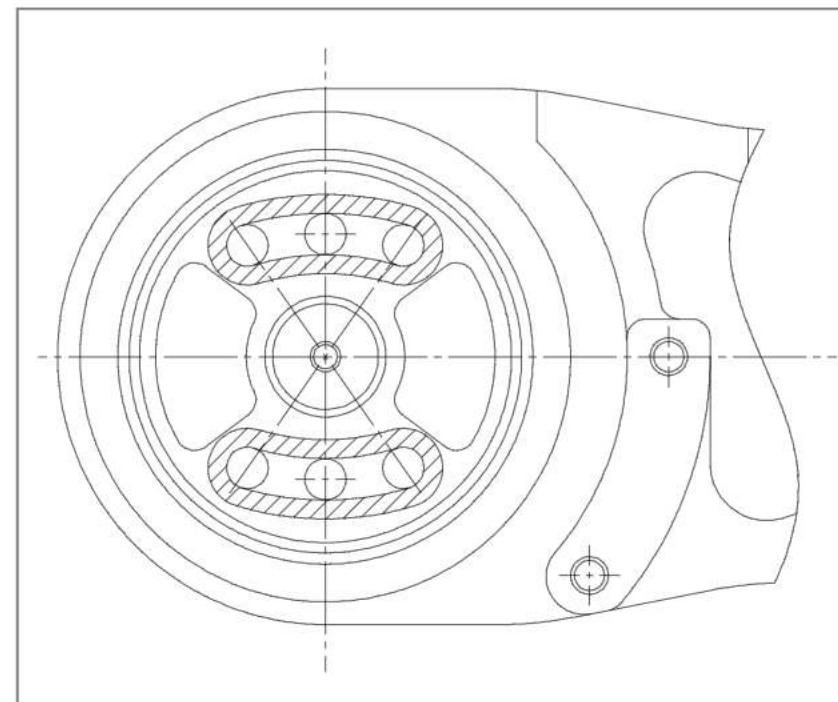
(b) Applying sealant to the J3-axis reducer
